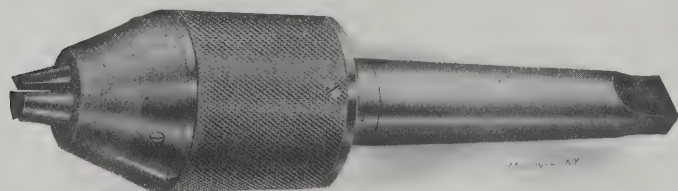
Coit's Ball-bearing Drill Chuck, made by the Standard Machinery Co., Mystic, Conn.
